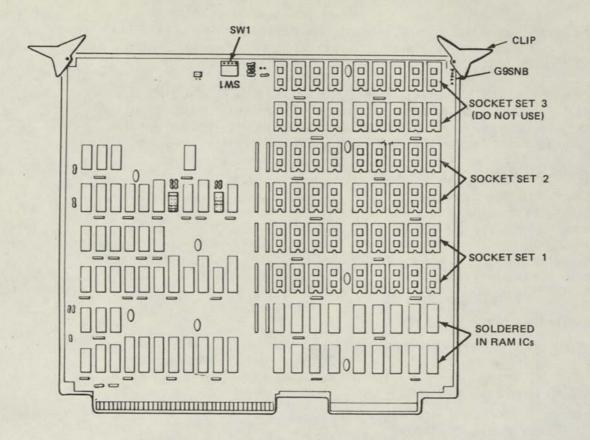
The APC-H31 Memory Expansion Unit PCB (G9SNB)
